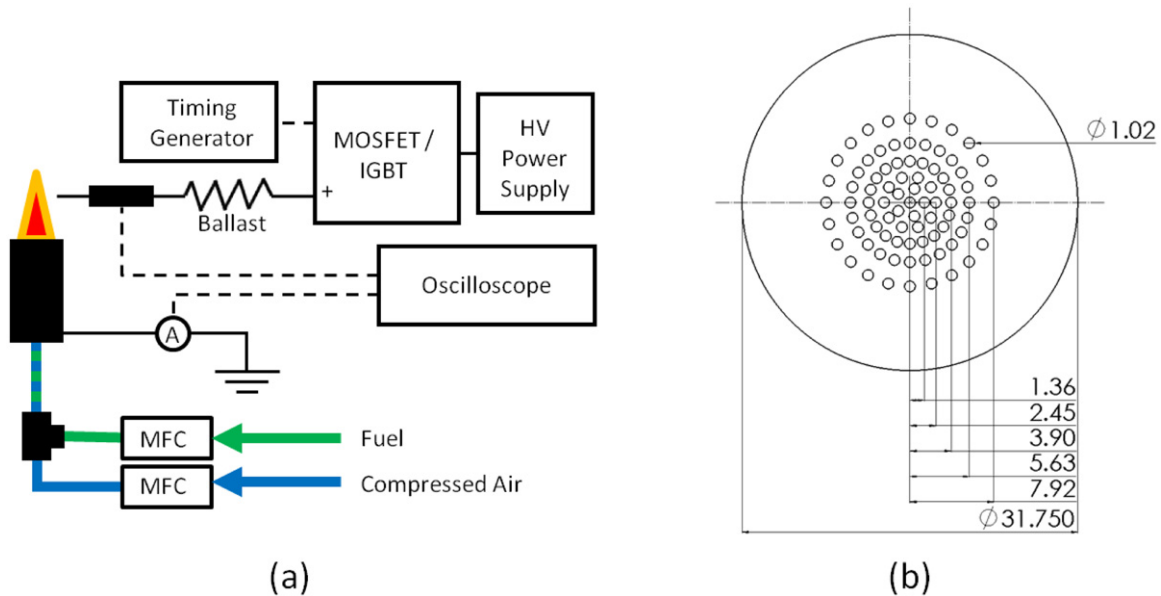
(a) Electrical and flow schematic of experimental setup. (b) Top view of burner geometry. Dimensions are in mm.
